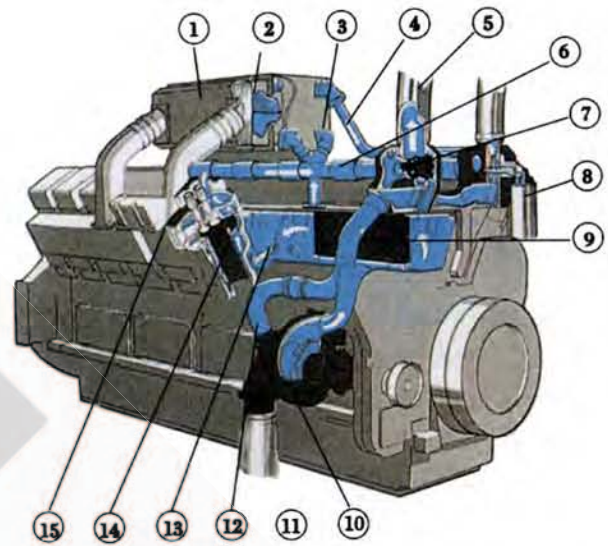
Coolant flow schematic - KTA-50 Engine
